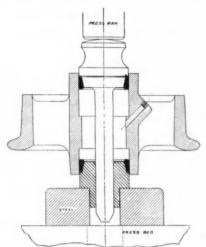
Method of pressing outer bearing races into wheel hubs. This simple fixture is the only mechanical means necessary to install bearings in wheels
